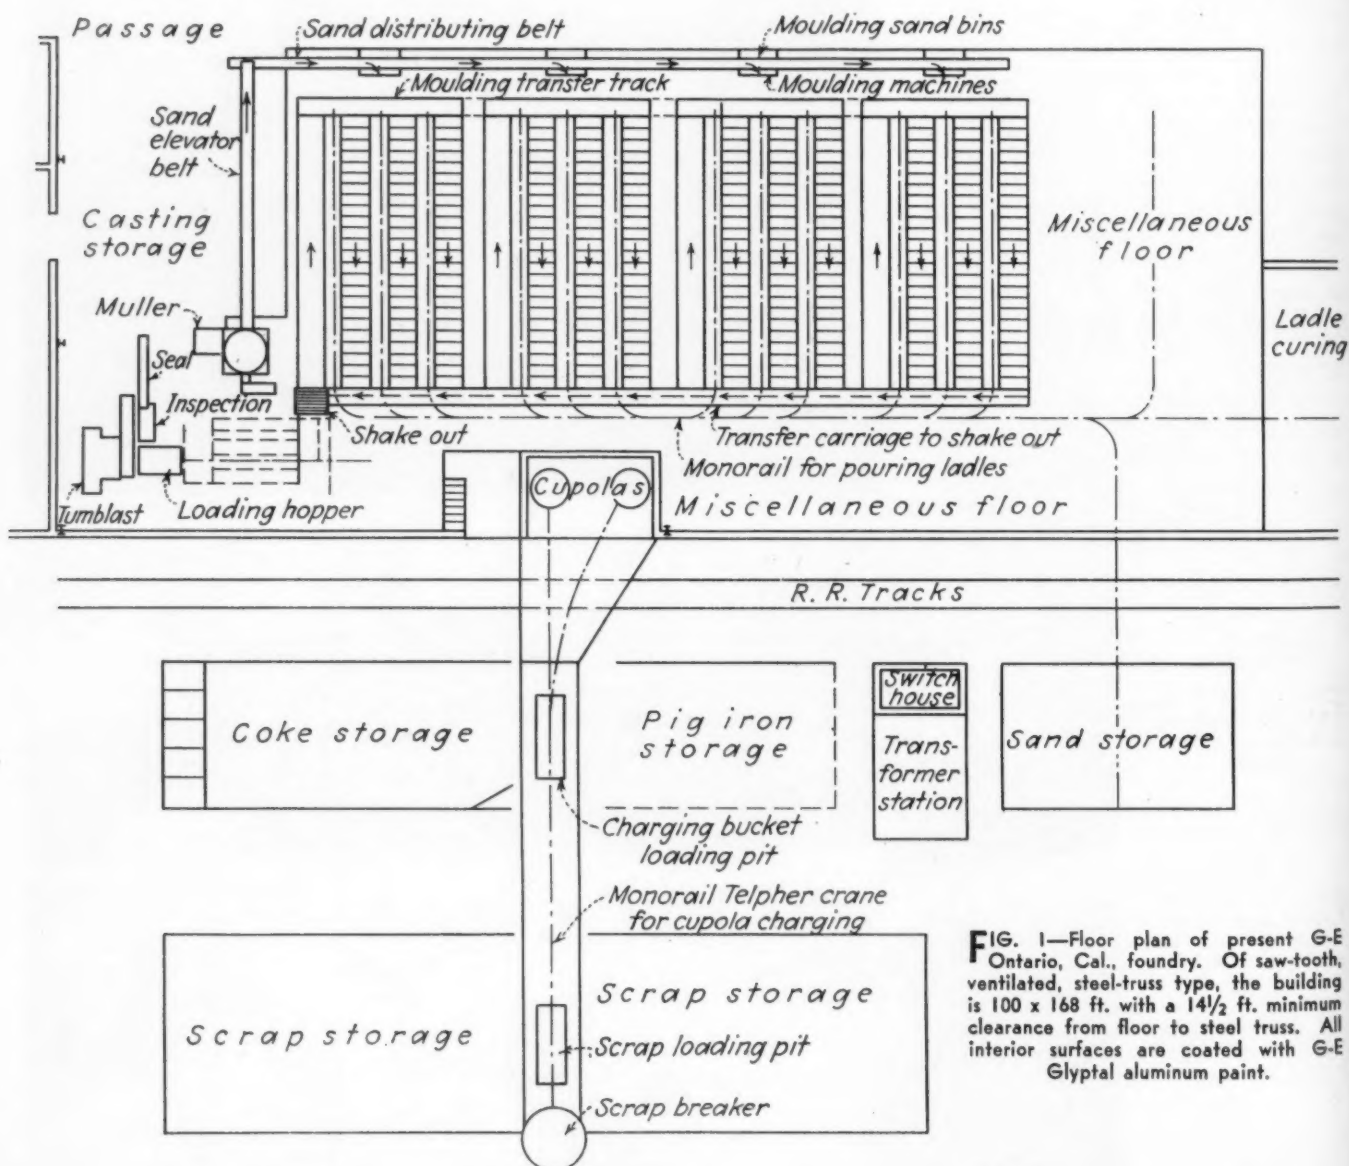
Floor plan of present G-E Ontario, Cal., foundry. Of saw-tooth, ventilated, steel-truss type, the building is 100 x 168 ft. with a $14\frac{1}{2}$ ft. minimum clearance from floor to steel truss. All interior surfaces are coated with G-E Glyptal aluminum paint.
